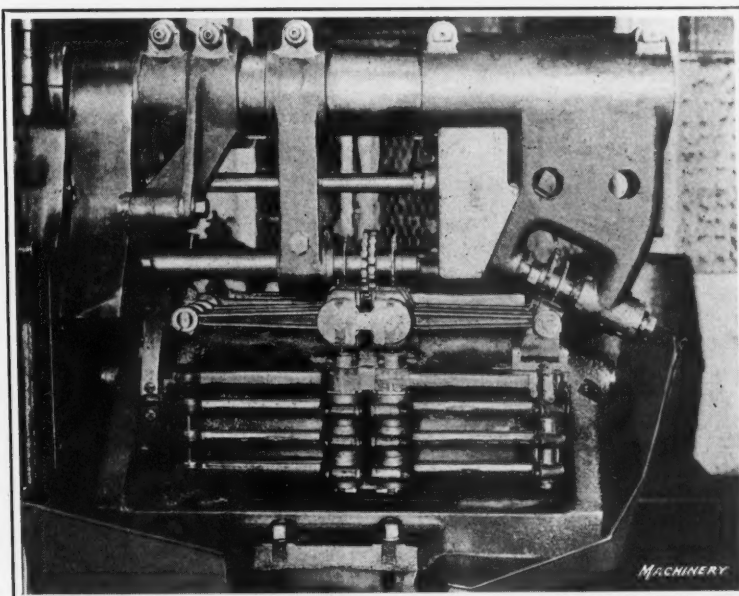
Fixture and Special Milling Attachment for facing and slotting Large and Small Ends of Connecting-rods
